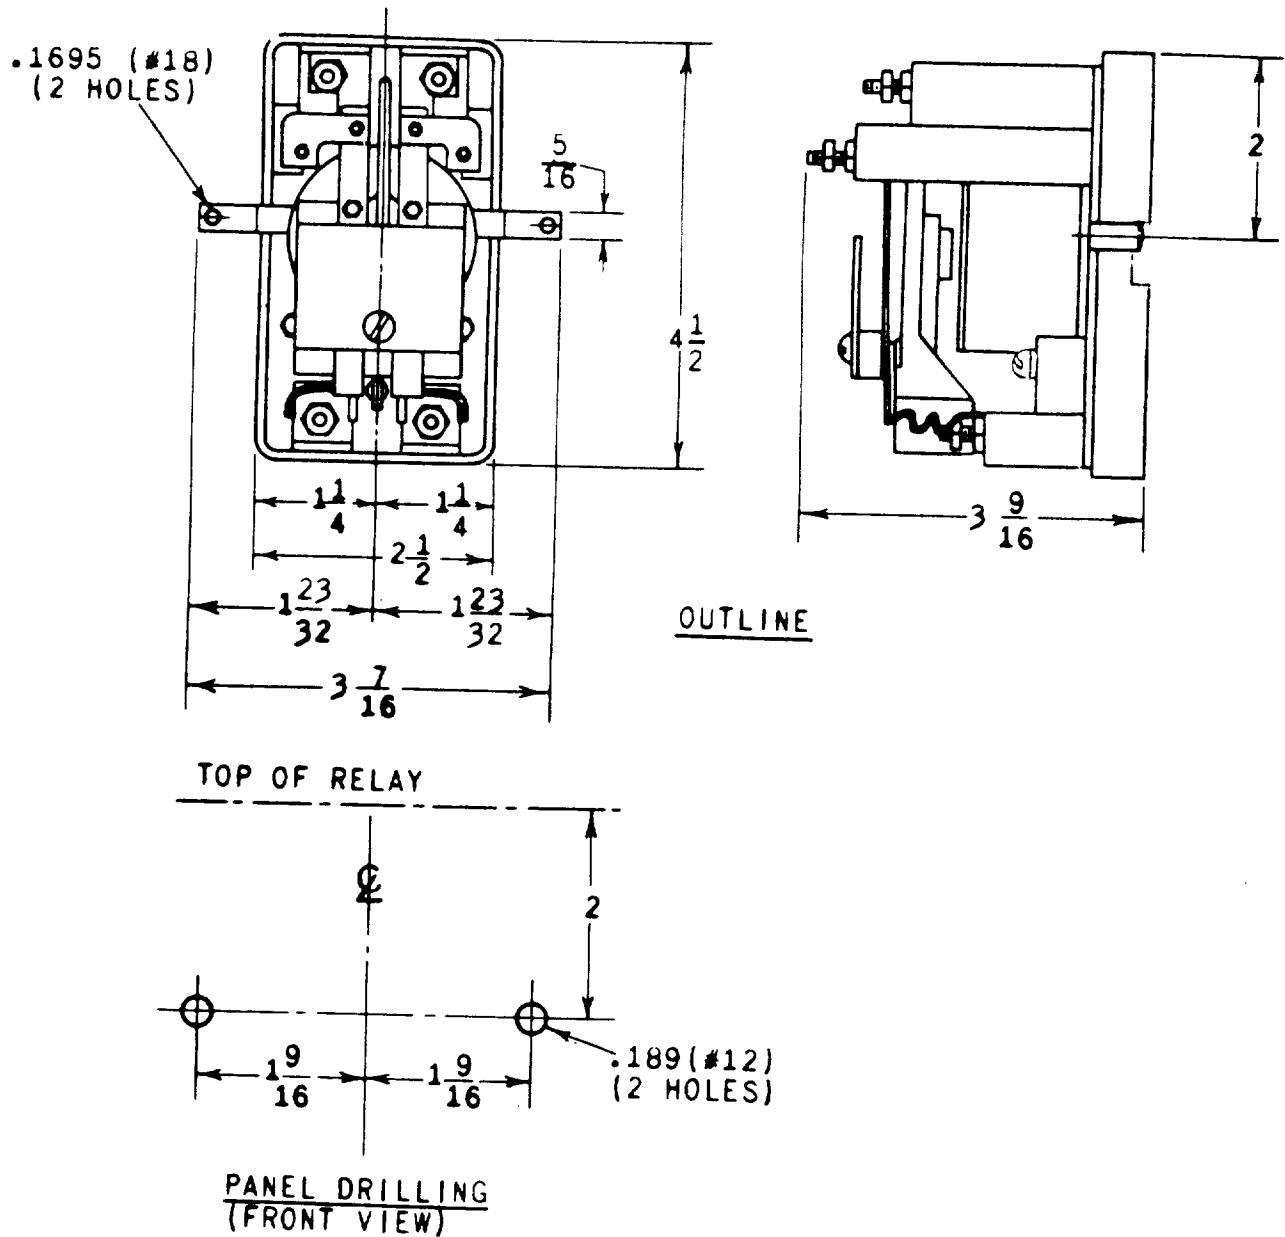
(0148A3971-000) Outline and Panel Drilling for Front Mounting of HGA17M and HGA17R Relays
